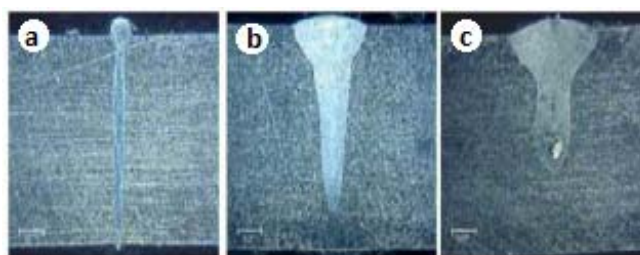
Cross sections of bead on plate welds for single mode and multimode
